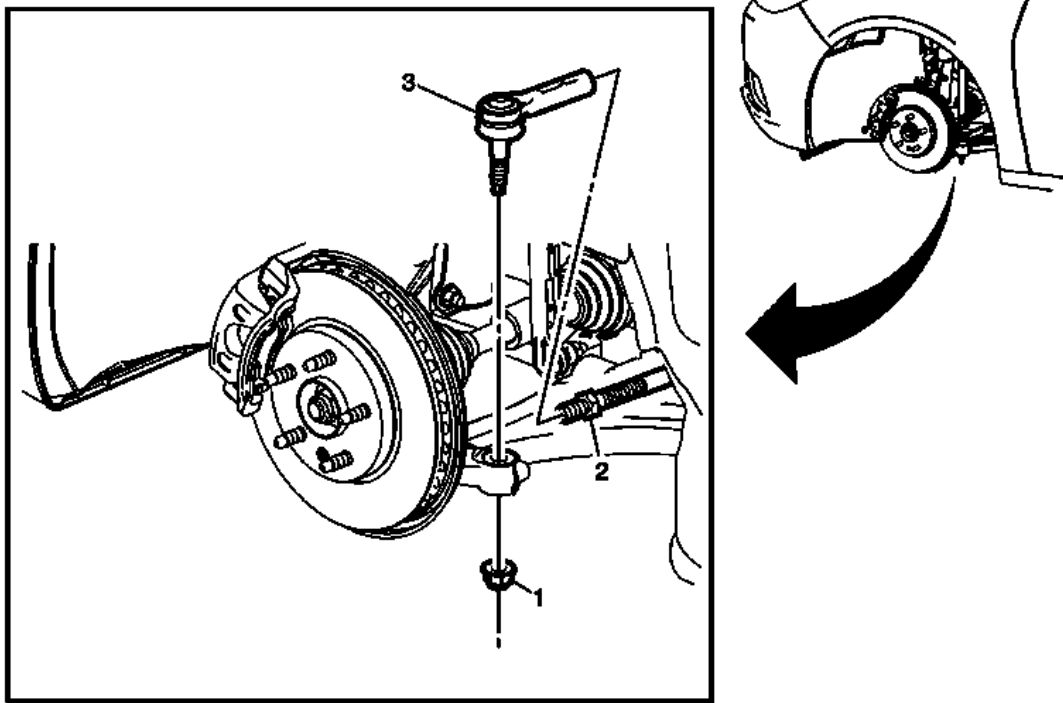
Steering Linkage Outer Tie Rod And Nuts
